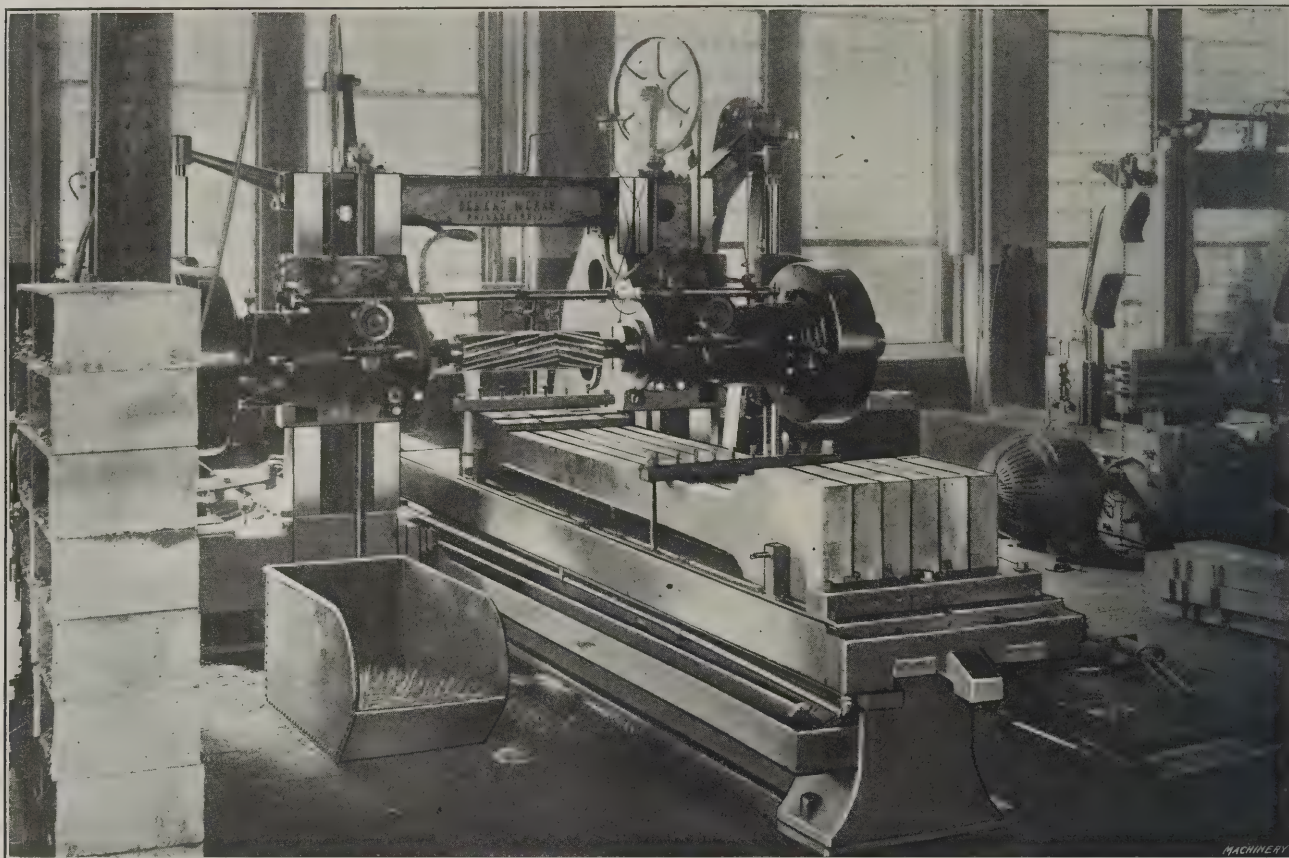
Horizontal Milling Machine in which the Edges of Six Main-rods are milled simultaneously
